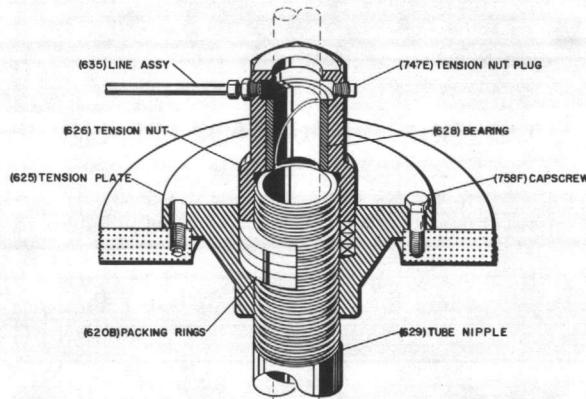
Tension Plate Assy (Drip Feed Lubrication)
